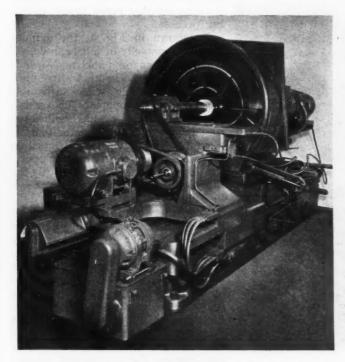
Rear View from Right-hand End of Grinder Shown in Fig. 1
